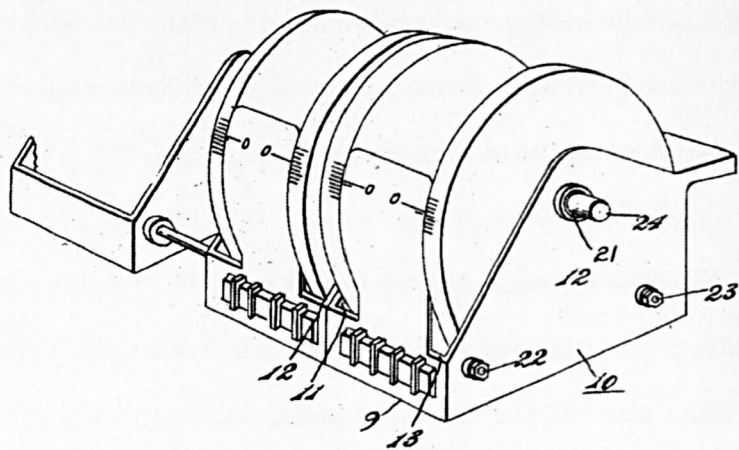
Cam-based switching arrangement (Roessler Jr., 1958)
